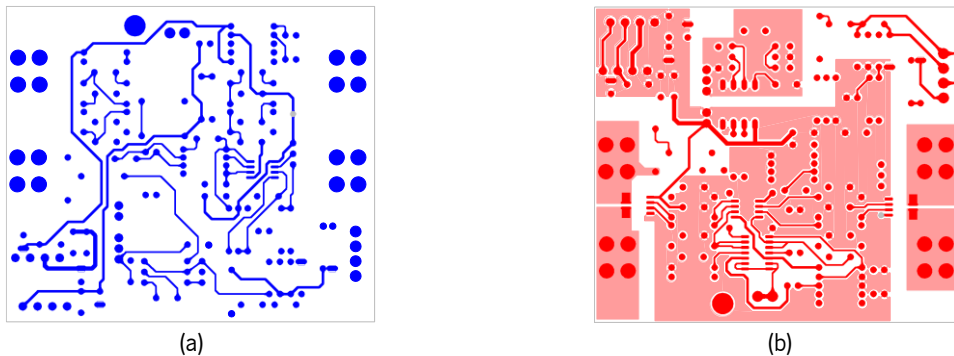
Protection circuit PCB layout design: (a) Top layout; (b) Bottom layout.
